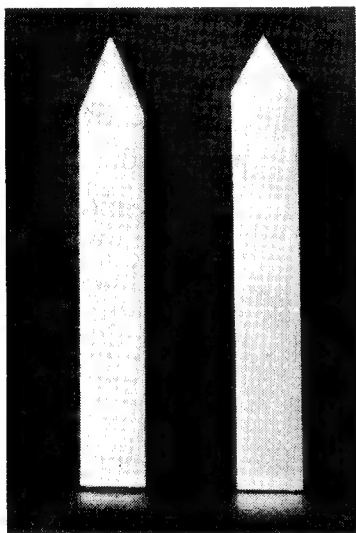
Engraving tools with 45 deg. and 60 deg. points
